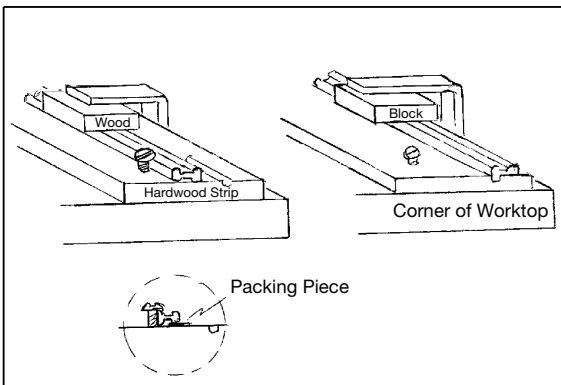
Clamping the rail to the edge of the workbench. The screw acts as a guide when filing the running face of the railhead. Flat bottom rail has its head supported on a packing piece to hold it square for filing.
